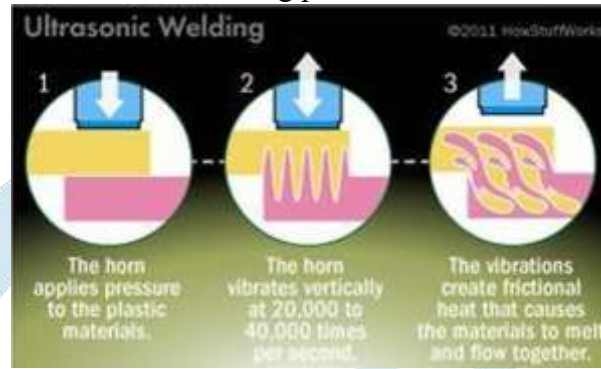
Process Steps of Ultrasonic Roller Welding
